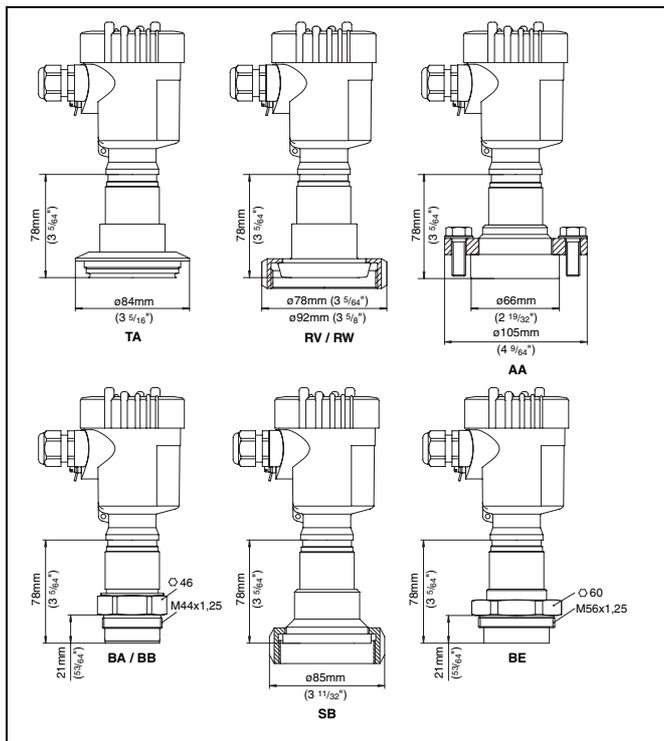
VEGABAR 65, threaded and hygienic fitting - part 2
